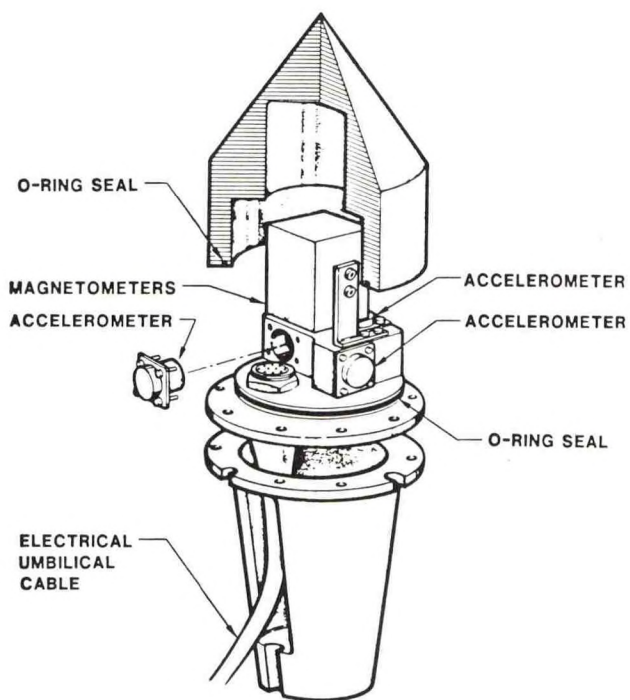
Drawing of the Sandia seismic probe inserted 5m below the mudline.
